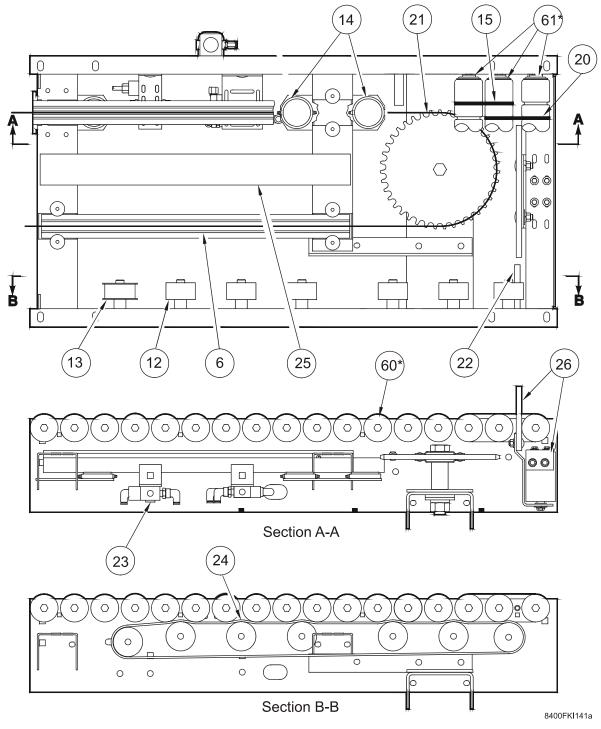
Accuglide Idler Section (LH Assembly Shown)
